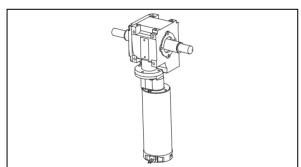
ELECTRIC MOTOR AND SPEED REDUCTION GEARBOX
